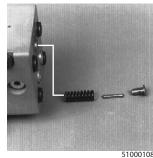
Remove Pilot Piston Pin and Control Start Spring
